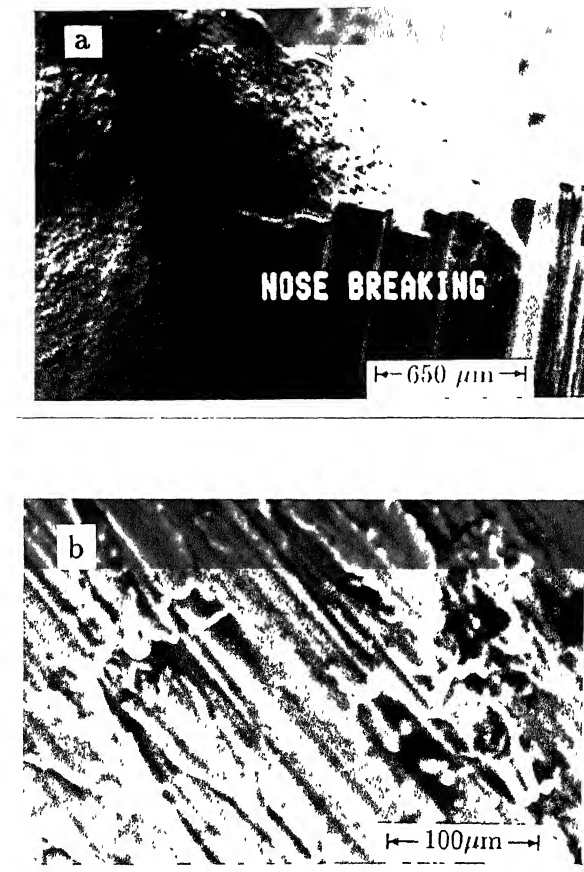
SEM pictures of tool made of alloy G after cutting E9 steel at 180 m/min., showing : (a) nose breaking, and (b) magnified view of the broken surface.
